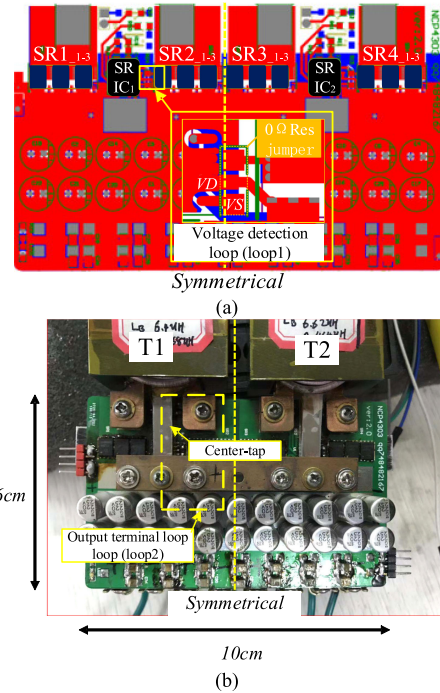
Image of secondary PCB layout and prototype. (a) PCB layout top side. (b) Secondary prototype.
